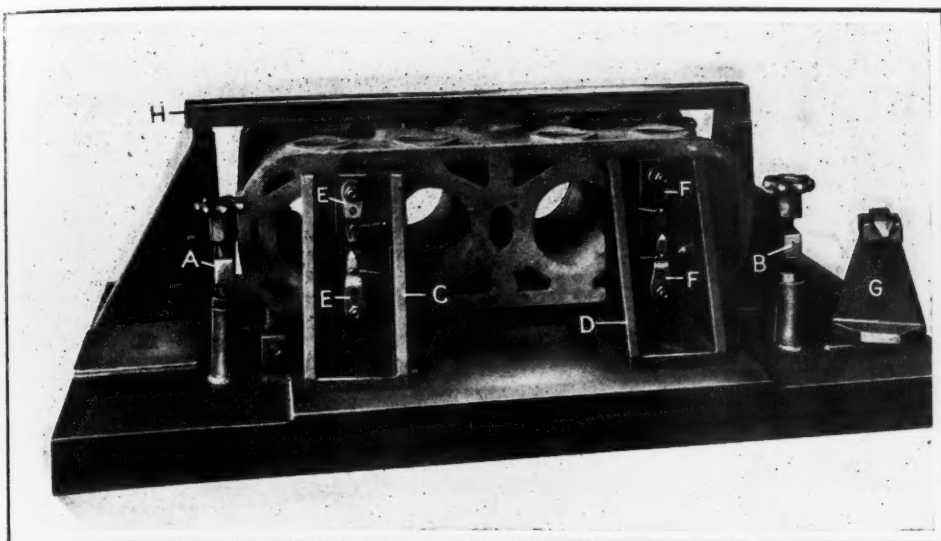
How Rough Cylinder Blocks are Checked Prior to Machining
